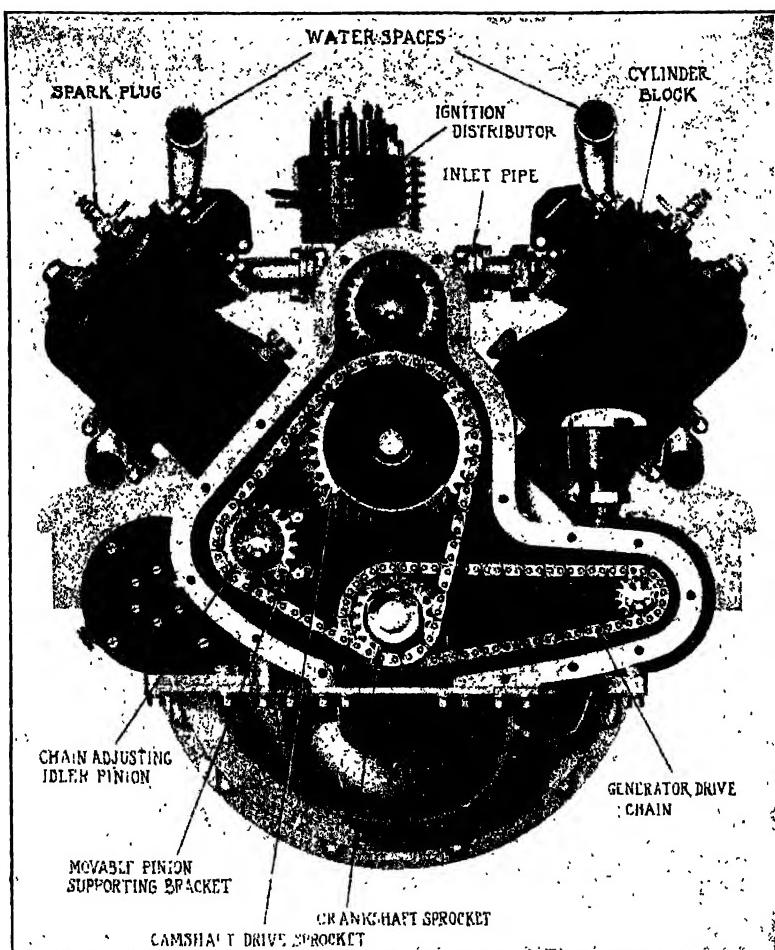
Front View of King Eight Cylinder Motor. Note Method of Camshaft Drive Chain Adjustment.
